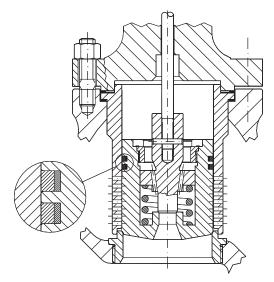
Threaded seat - Balanced trim with Pilot Plug
